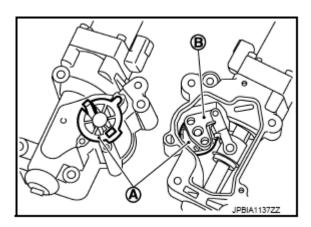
Identifying VVEL Actuator Arm And Holding Jig Courtesy of NISSAN MOTOR CO., U.S.A.
